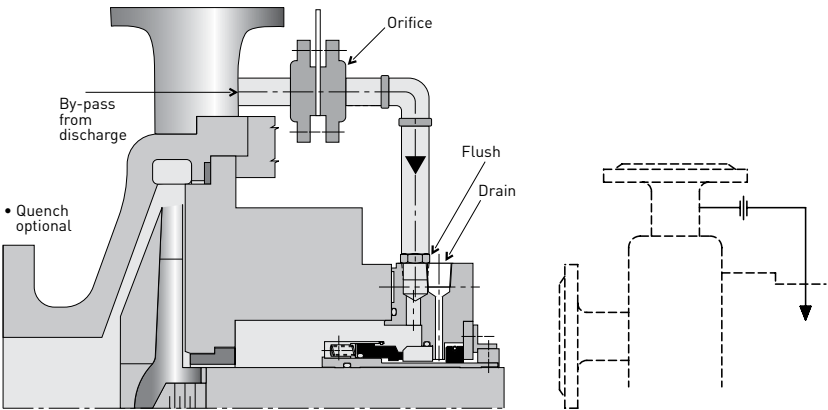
API PIPING PLAN FOR ARRANGEMENT 1
